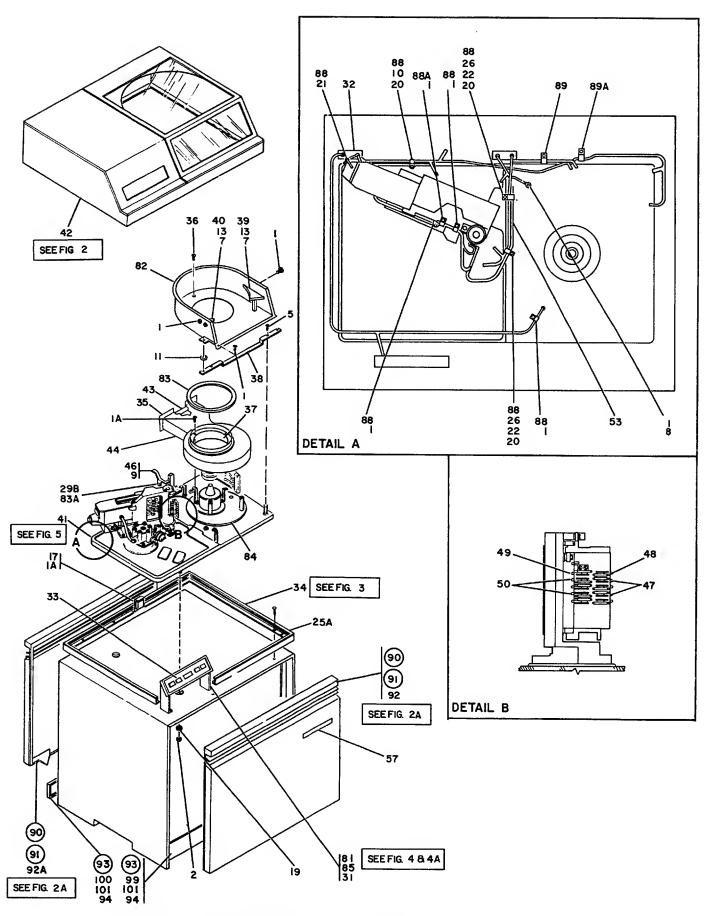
2311 DISK STORAGE DRIVE FINAL ASSEMBLY. SHEET 1 OF 2. SEE LIST 1.
